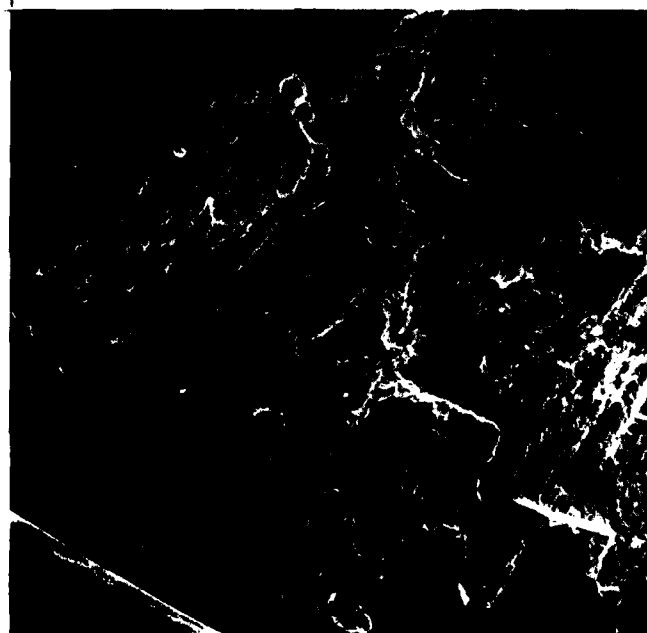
SURFACE DAMAGE PRODUCED ON TAPERED ROLLER BEARING CONE SURFACE DURING ROLLING CONTACT
